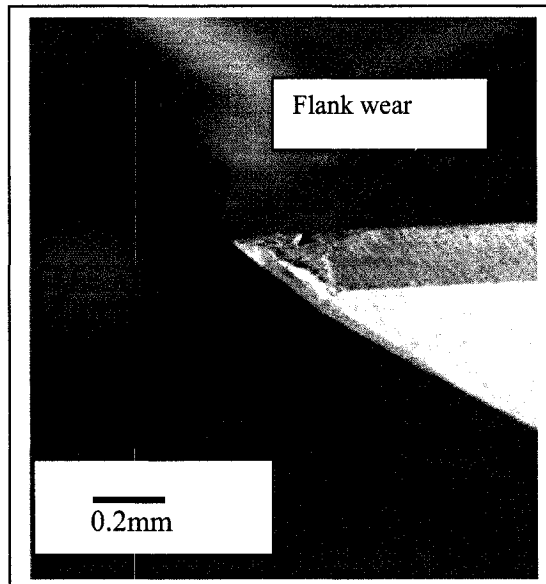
Wear surface, cutting speed= 70 m/min (1170 rpm), depth of cut = 0.7 mm , feed = 0.025 mm/tooth, stable cut
